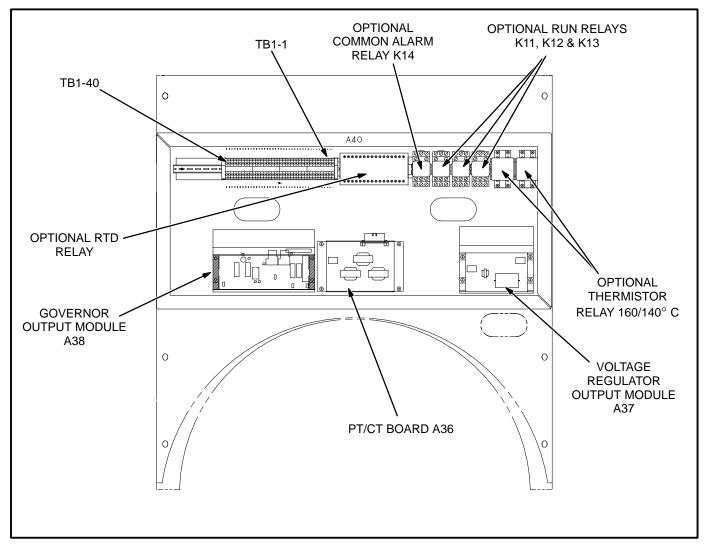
ACCESSORY BOX COMPONENTS
